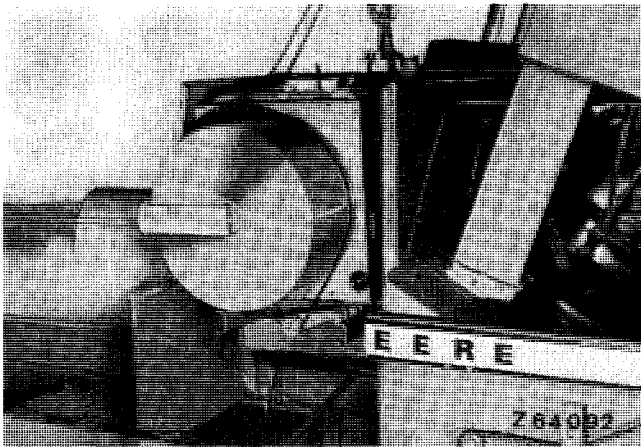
Engine Being Removed Sideways from Side of Combine
